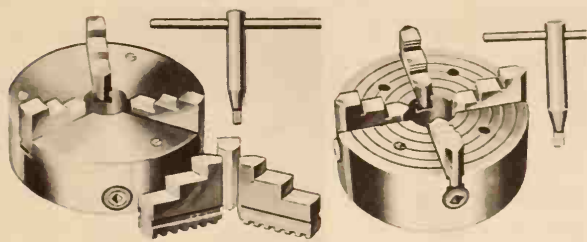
Lathe chucks. Left, 3-jaw universal chuck. Right, 4-jaw independent chuck. (South Bend Lathe)
